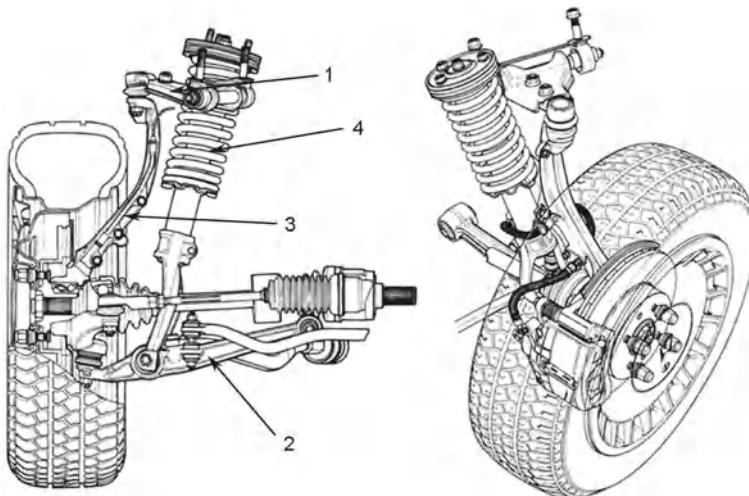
Front double-wishbone suspension for a driving axle. 1 Upper arm; 2 lower arm; 3 strut; 4 spring and shock absorber assembly (from Genta and Morello 2009)
